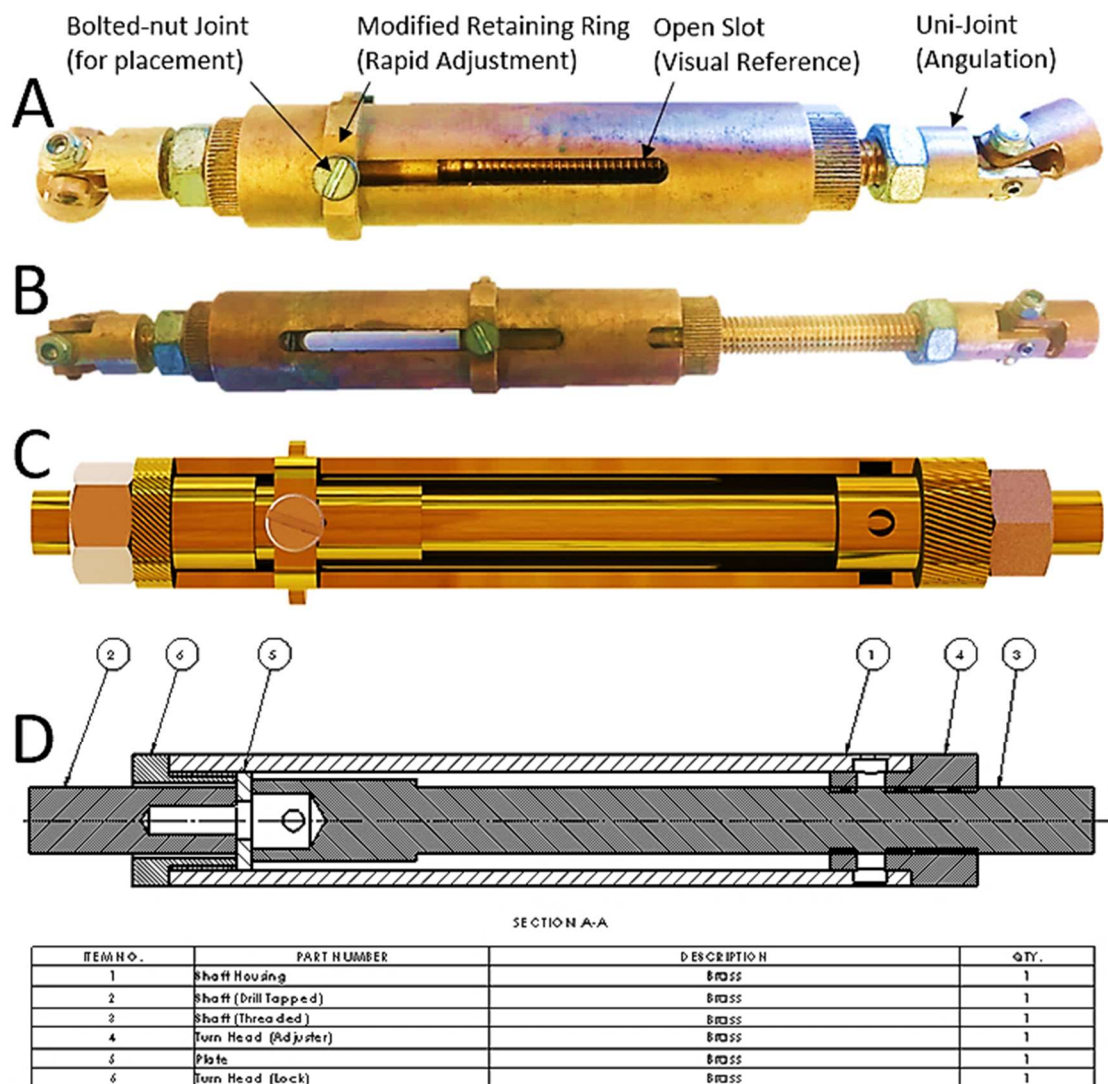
(A) Physical outcome of the Rapid-Finite Longitudinal Elements, indicating specific and intricate parts (B) A sample length of the longitudinal element, demonstrating the positioning of the translating shaft relative to the element's length (C) Sectioned 3D graphic of the longitudinal element detailing the parts within the final assembly (D) A full labelled schematic of the longitudinal element demonstrating the component makeup of the assembly as part of the Adaptive External Ring Fixator.
